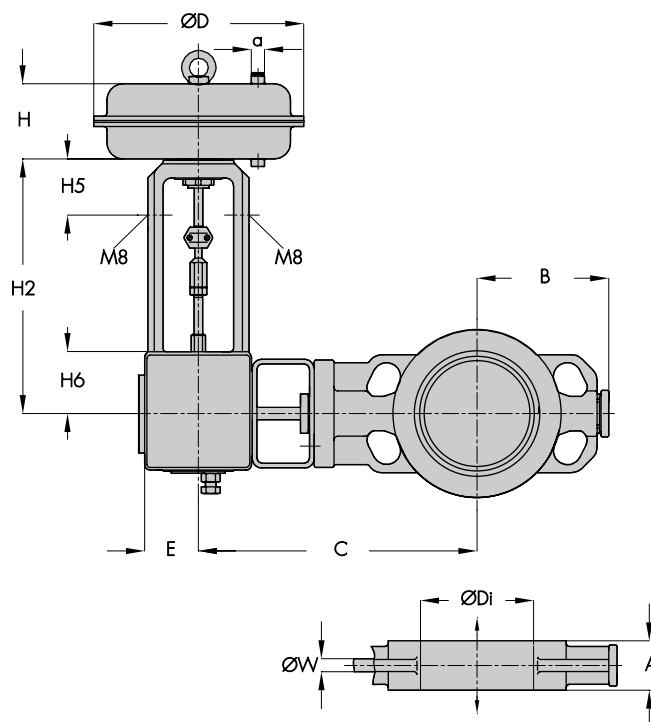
· Dimension diagram for Type 3237-1 Butterfly Valve
